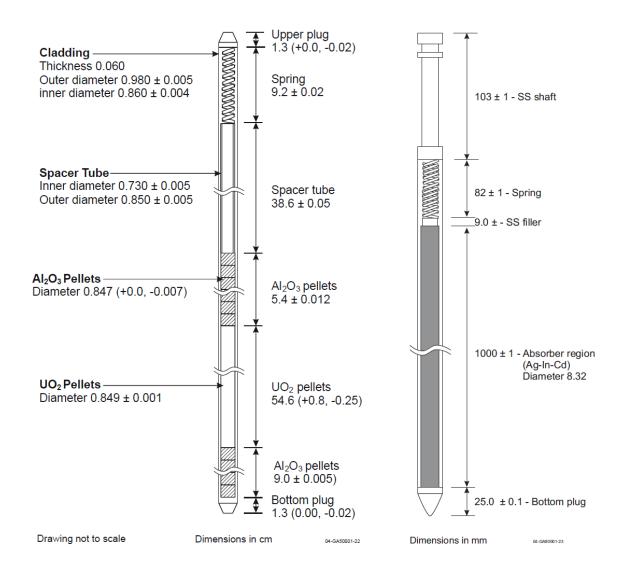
IPEN/MB-01 fuel and control rods dimensions.
